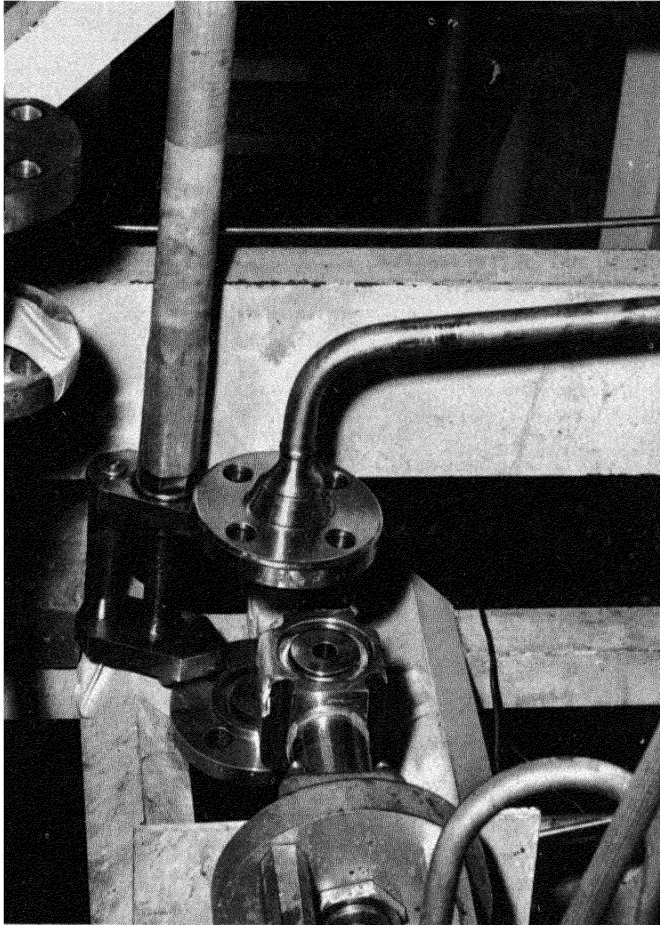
Flange-spreader tool for preventing damage to gaskets during removal of low-pressure flanges. Shown in place during maintenance operation on HRE-2.
